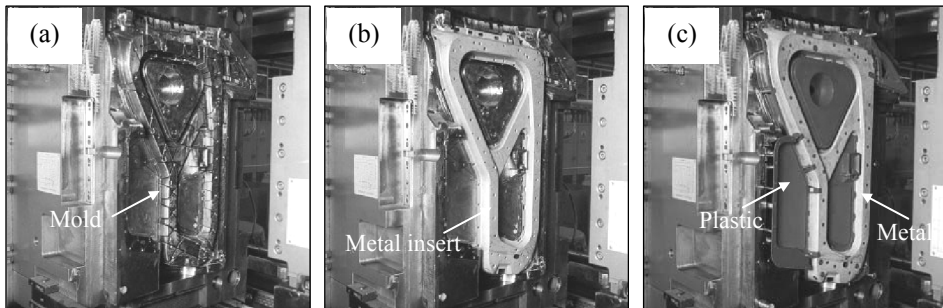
Manufacturing process of metal-plastic hybrid in automotive industry, (a) open mold, (b) perforated metal insert in mold, and (c) finished injection-molded metal-plastic hybrid, modified from [1].
